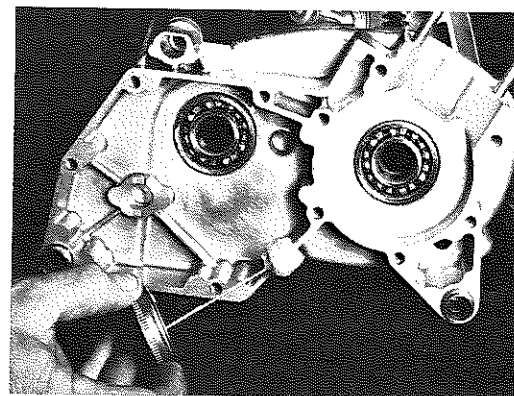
Applying sealer to crankcase sealing edge prior to reassembly.
